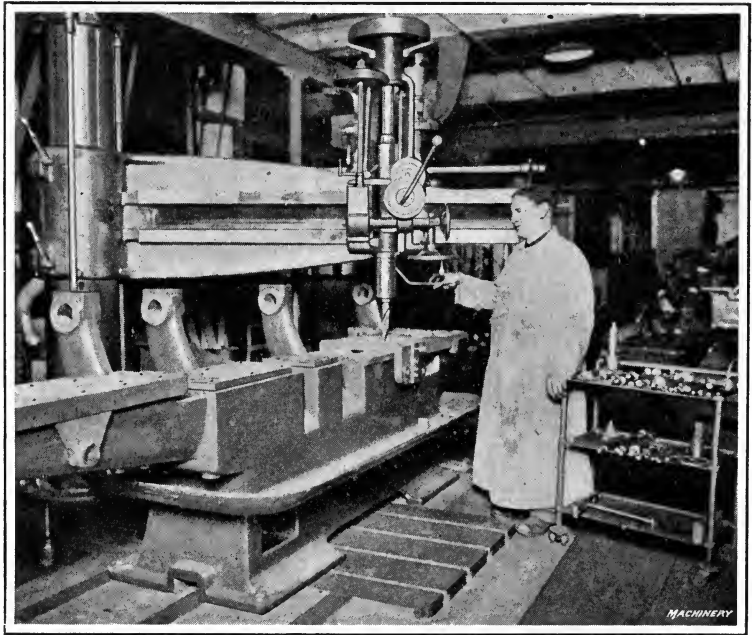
Radial Drilling Machine engaged in drilling Bed of a Machine Tool
